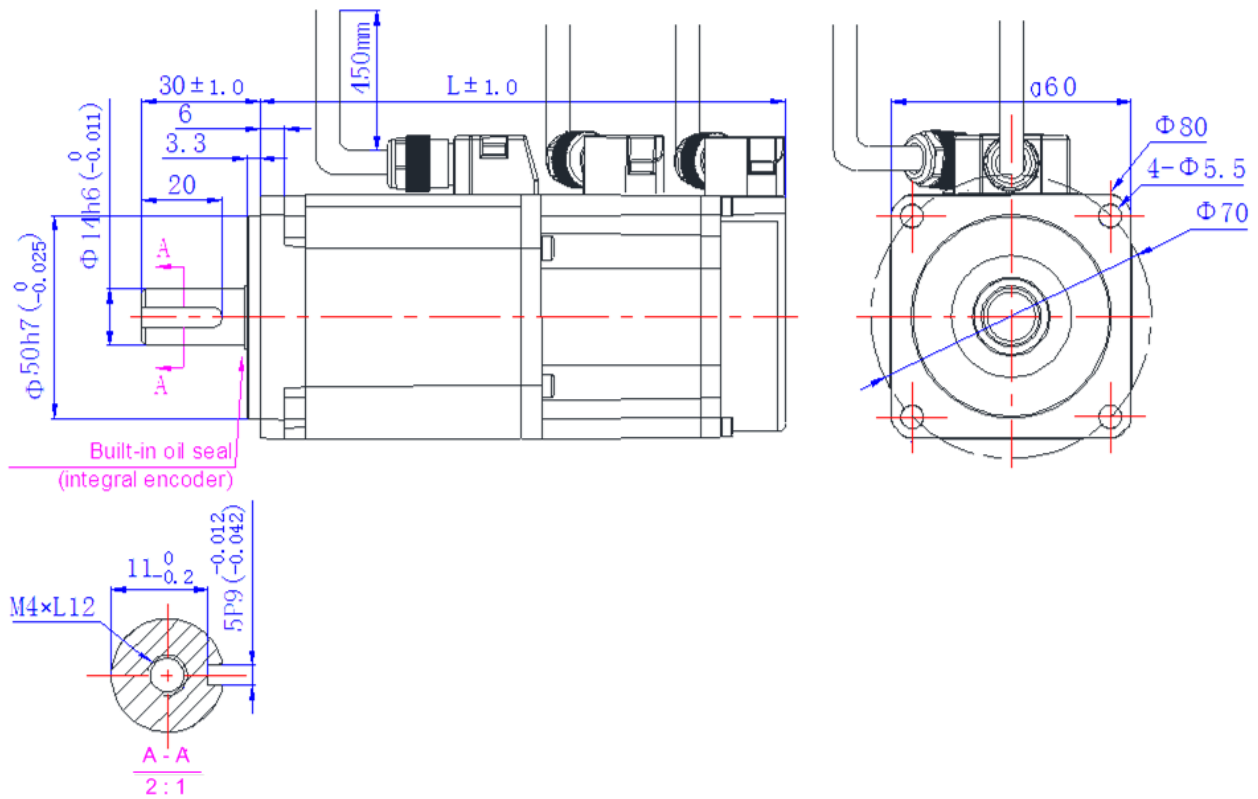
Outline dimensional drawing of ME060 series (magnetic brake)
